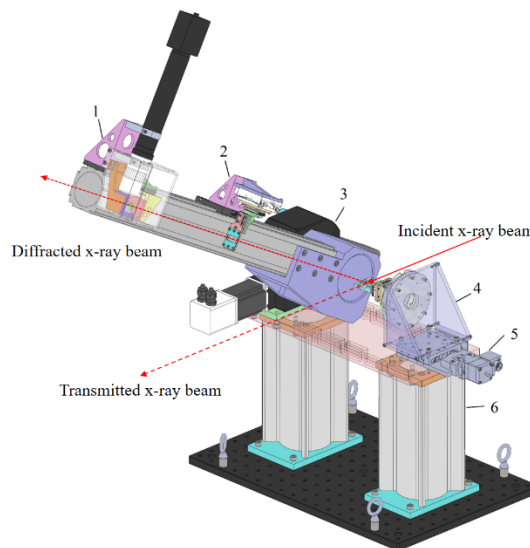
Complete assembly of Z8-83 wavefront sensor: (1) camera assembly, (2) grating assembly, (3) rotation arm, (4) crystal assembly, (5) Kohzu Precision Co. linear stage, and (6) modular support table.
